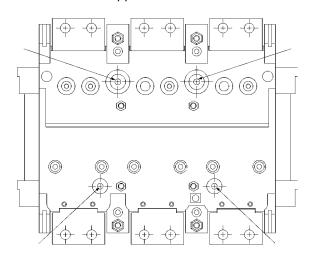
Locations of the $^1\!/_4$ –20 x $^3\!/_8$ -inch deep screw inserts for mounting the switch in equipment, 800–2000 A frames
